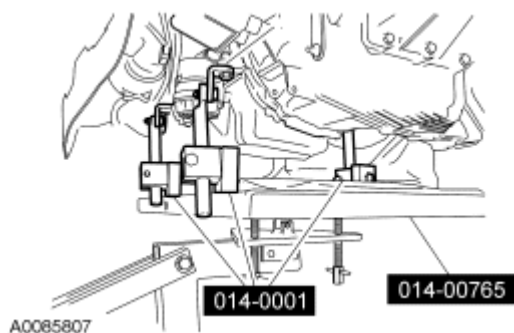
Securing Engine To Lift Table Using Special Tool (014-0001, 014-00765)
